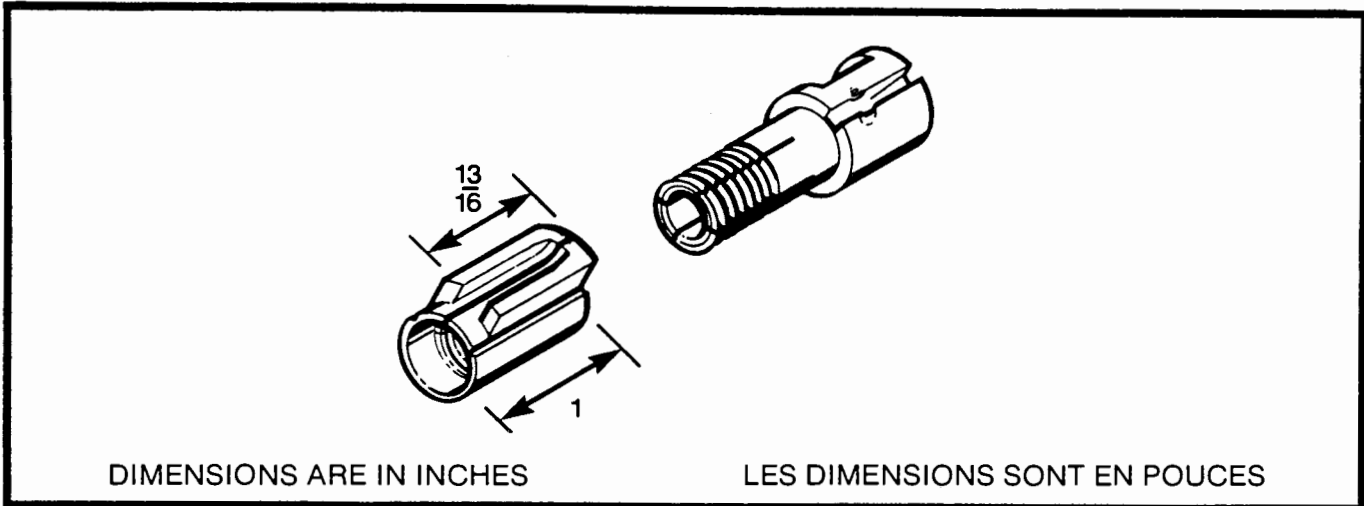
Trigger Guard Bushing Adjusting Jig
